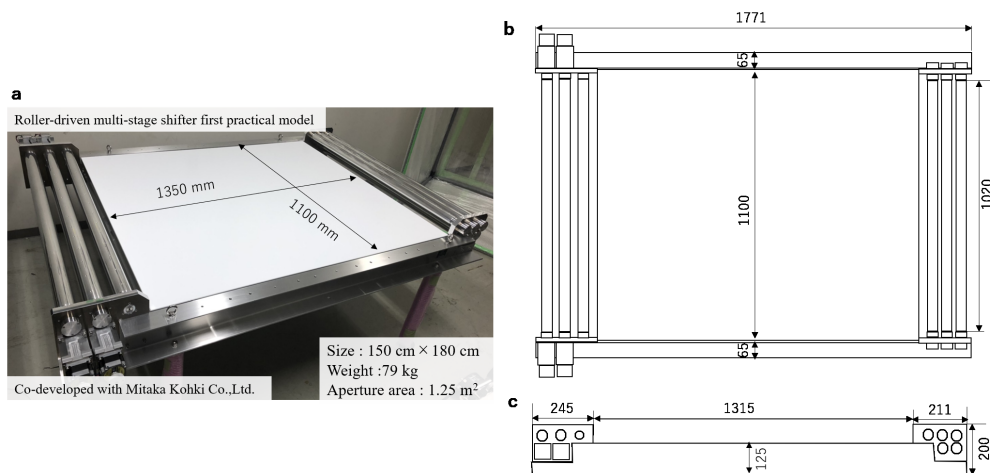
(a) Photograph of the first practical model of a roller-driven shifter and diagrams of the (b) top and (c) side view. It has five pairs of drive and tension rollers, and topmost drive roller is a fixed roller without a motor
